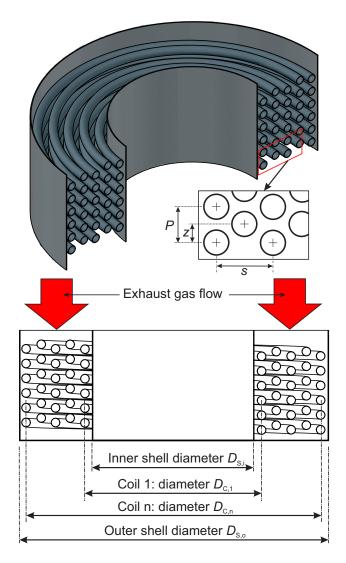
Schematic cutaway drawing of a shell and multi-coil helical heat exchanger.
